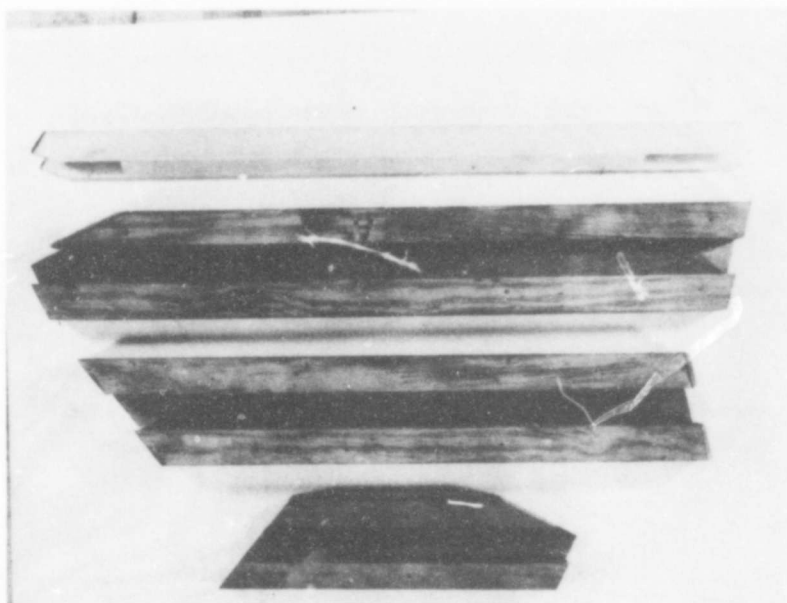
Jigging Used To Cut Tubular Elements to Final Dimensions.
